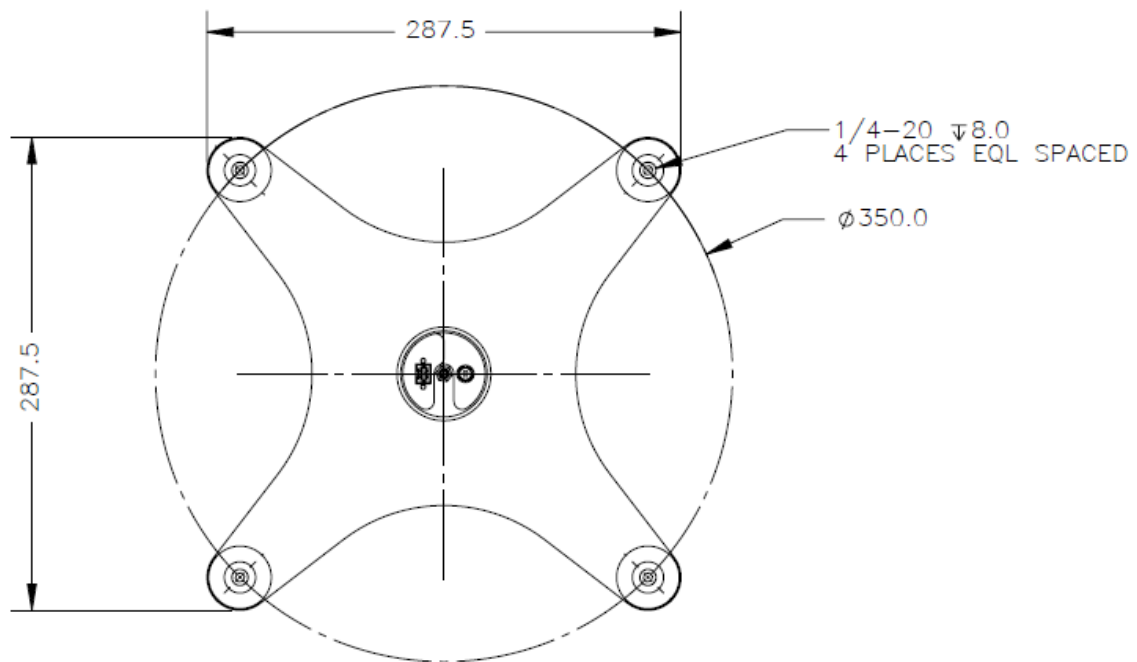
Mounting support dimensional drawing, bottom view (measurements in mm)
